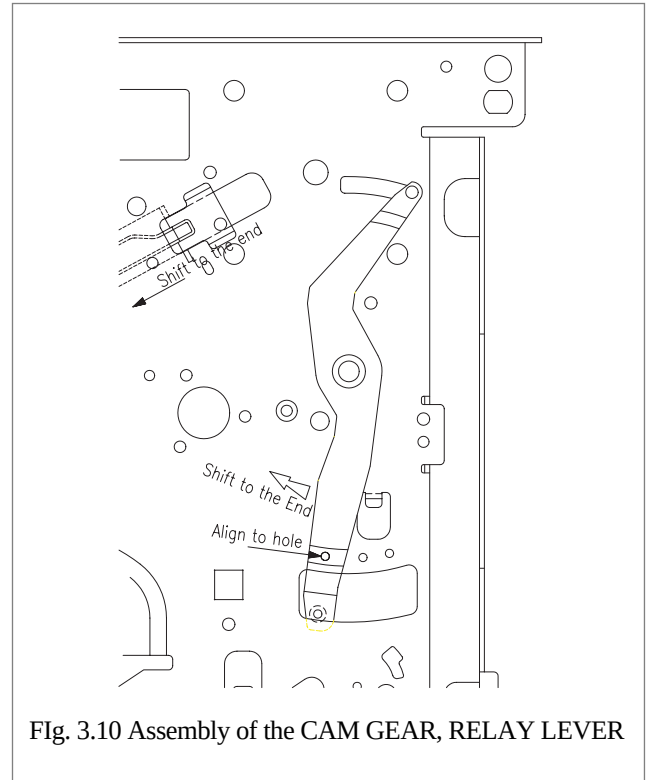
Assembly of the CAM GEAR, RELAY LEVER
